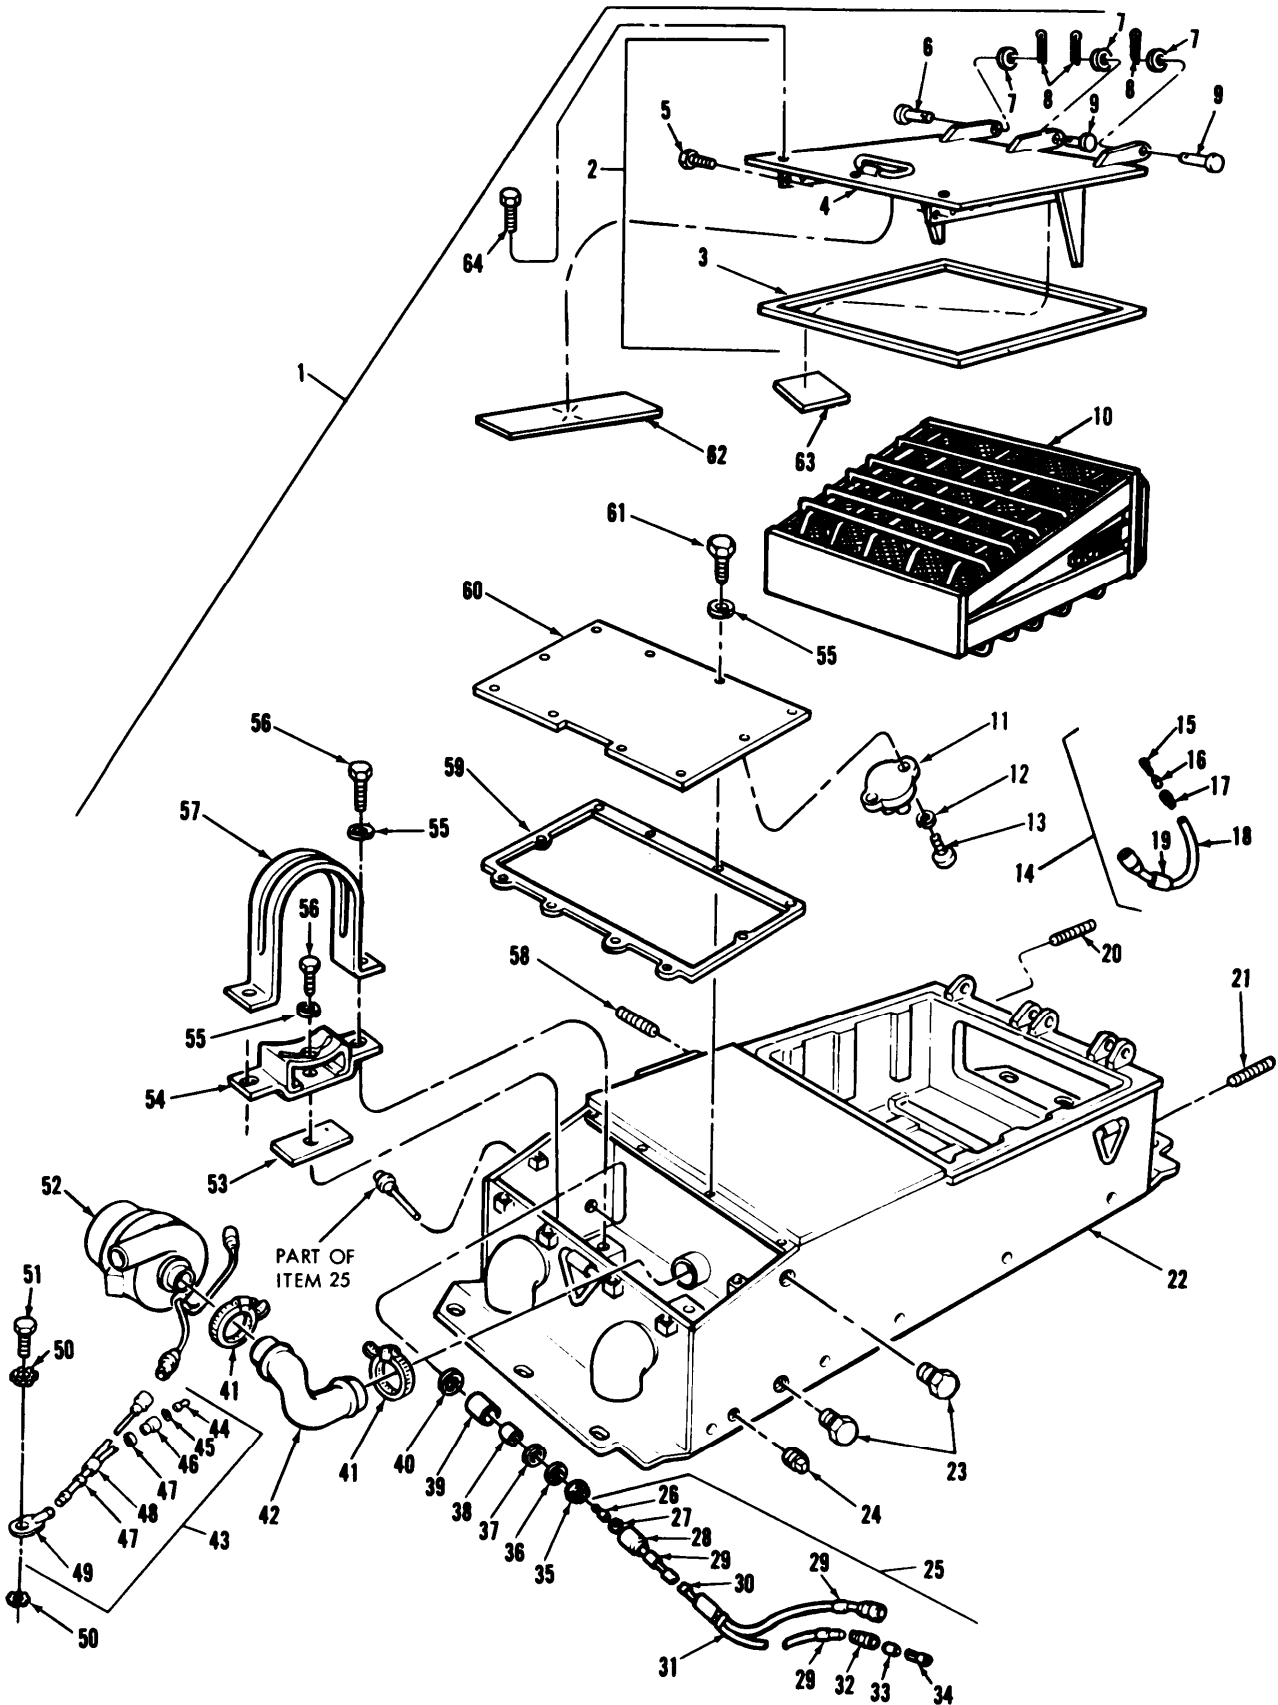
ARMORED TOP LOADING AIR CLEANER AND RELATED PARTS (2C AND 2D ENGINES).
